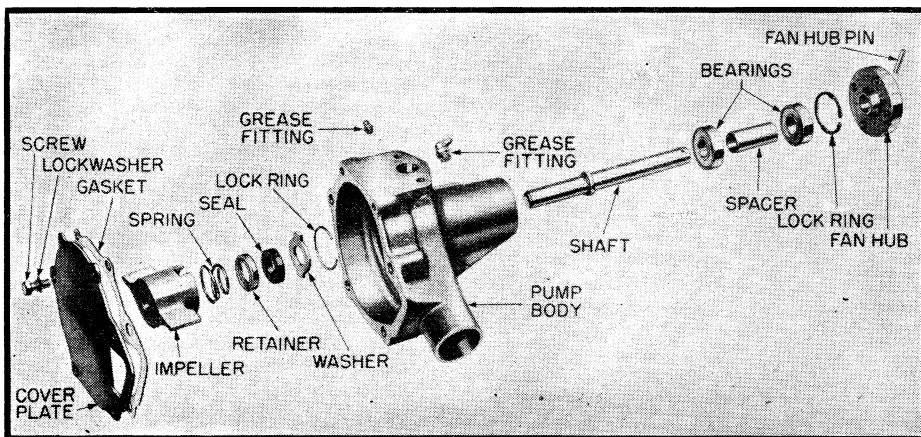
Water pump with removable bearings. Six-cylinder engines
